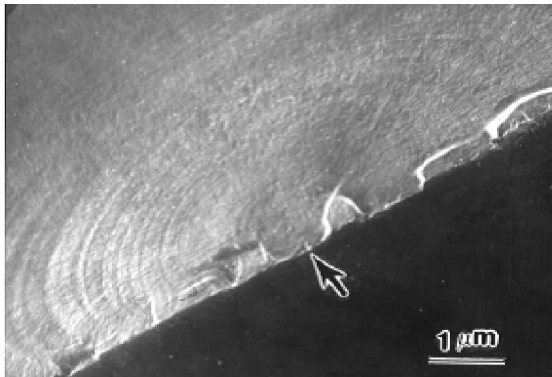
SEM of the fractured web at journal showing beach marks and crack origin
